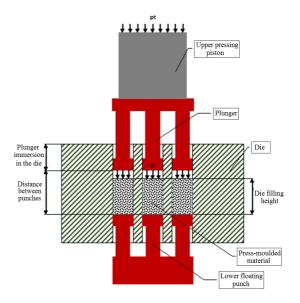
Schematic diagram of the process of press-forming stampings from refractory material
